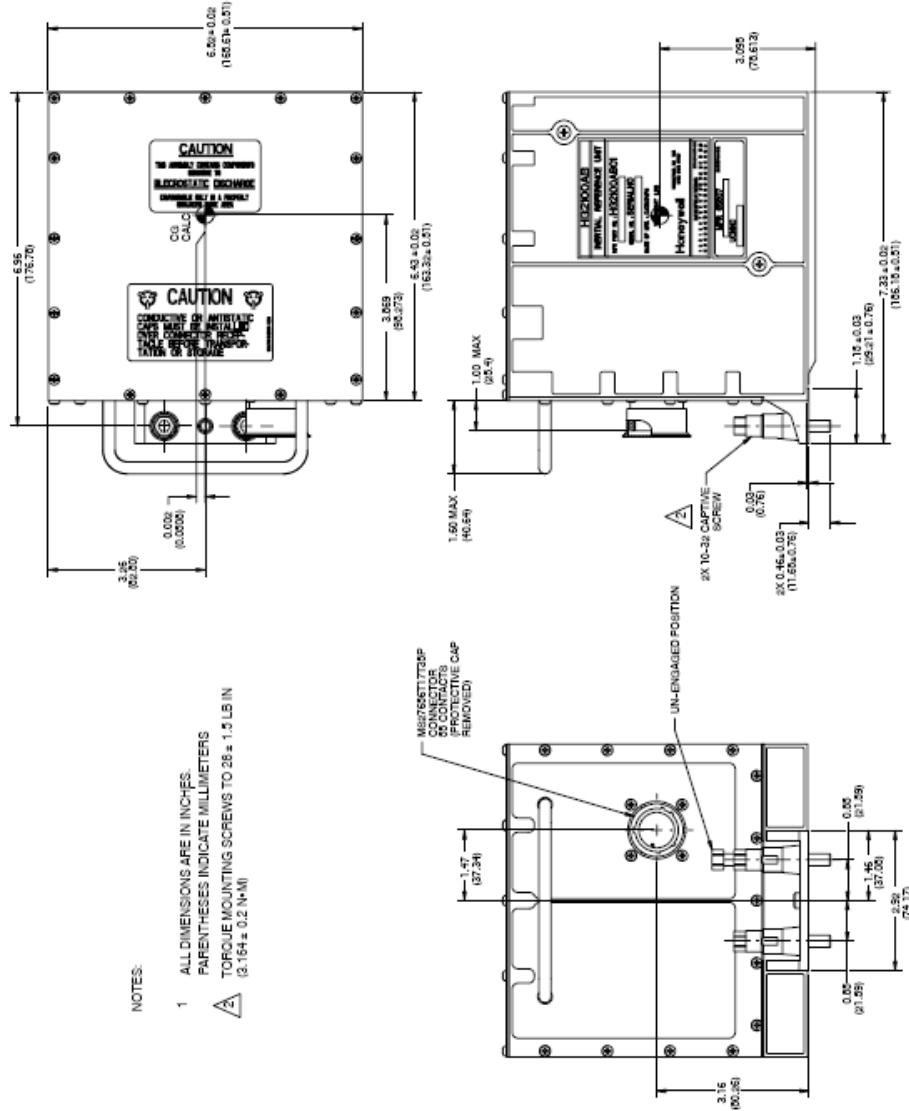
(1 of 4) IMU Type 21 Outline - Top, Side and Front Views
